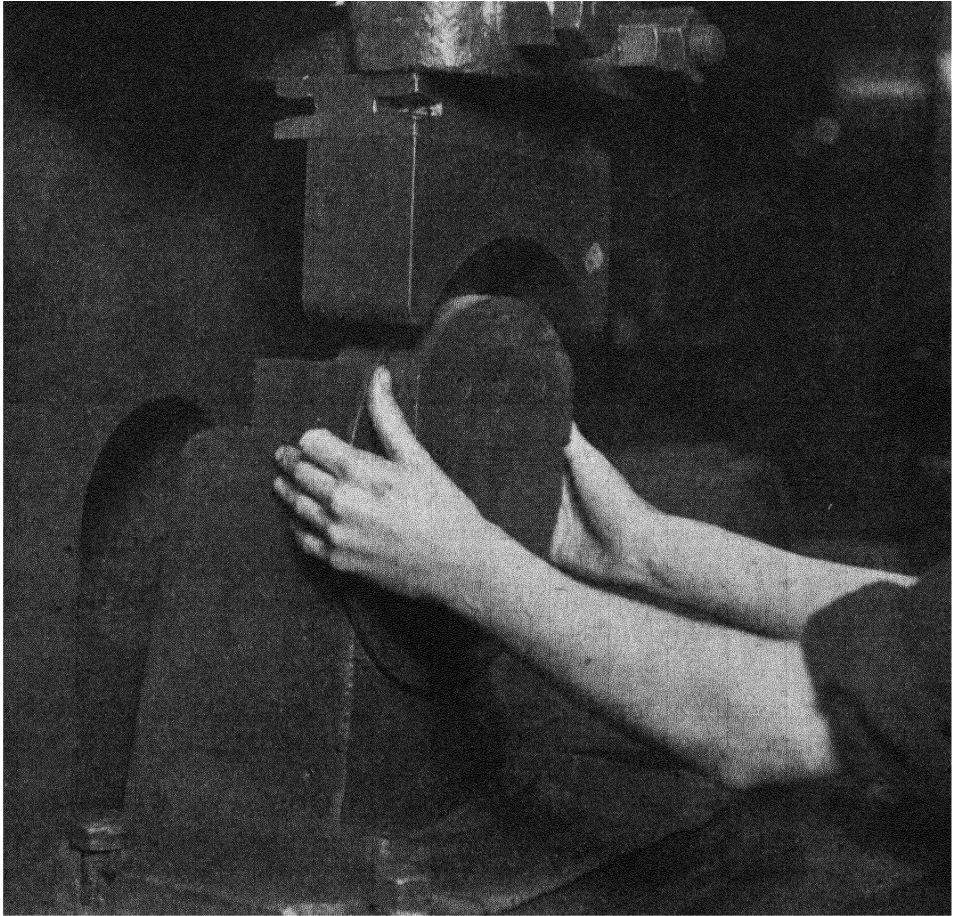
FINISHING A STARTER-RING-GEAR BLANK TO A TRUE CIRCLE IN AN UNGUARDED PRESS †
